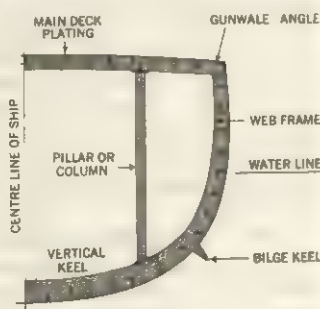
HALF SECTION OF A LONGITUDINALLY FRAMED DESTROYER
